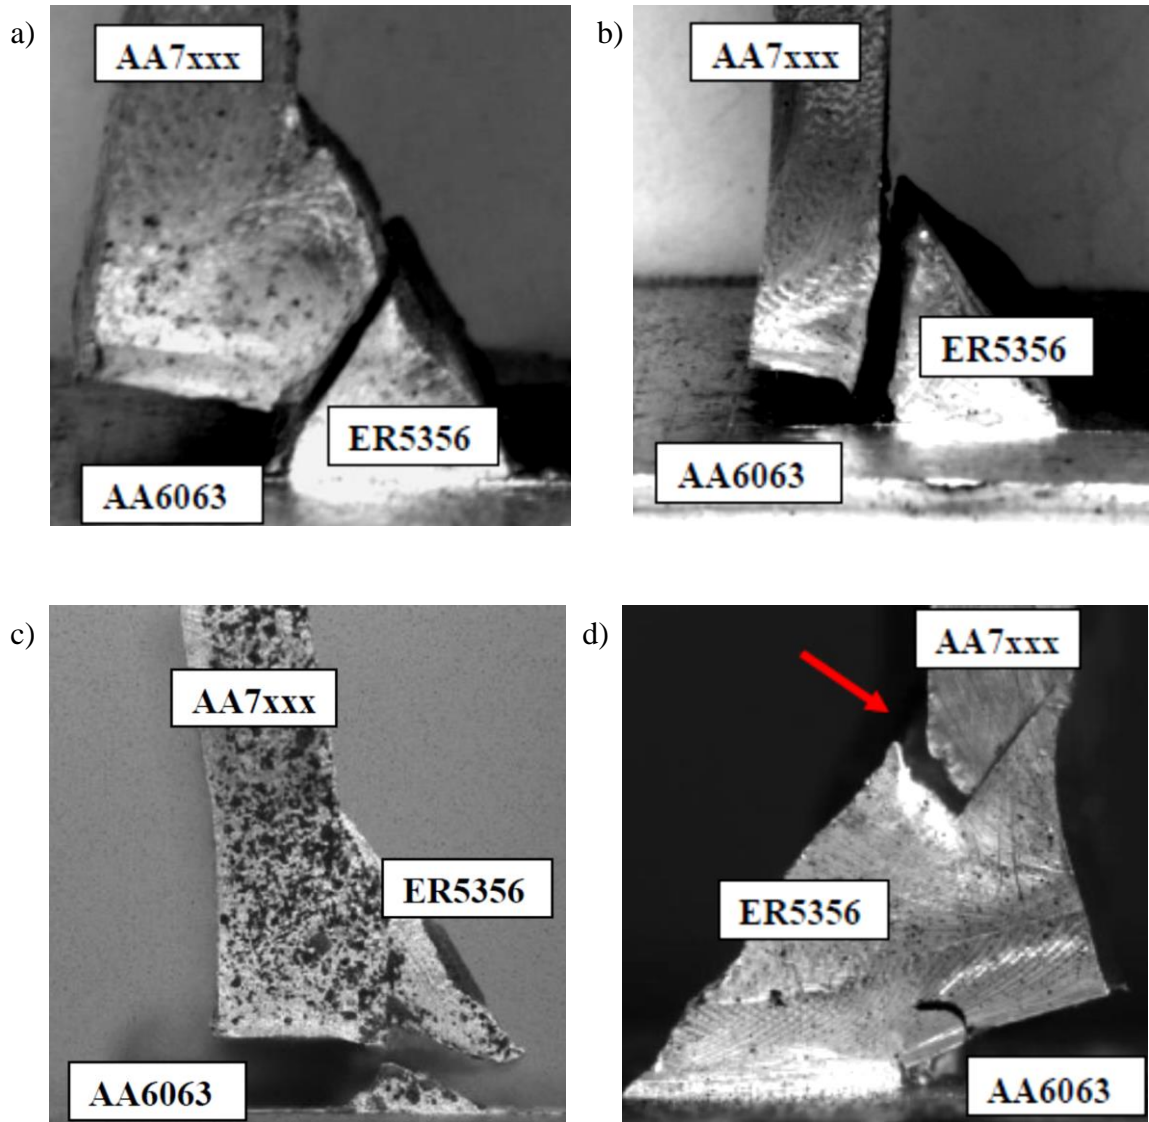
Observed fracture modes in T-joint welded samples (a) shear fracture across the weld throat (configuration H1) (b) fracture along the AA7xxx/ER5356 interface (configuration F3) (c) fracture along the AA6063/ER5356 interface (configuration H3) and (d) fracture in the HAZ of AA7xxx (configuration E1).
